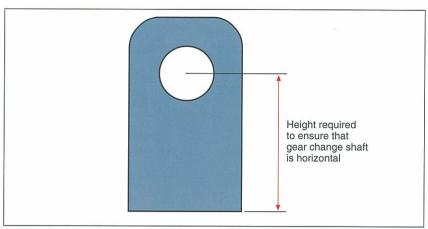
You'll have to adapt this basic bracket to give the required height to make sure that the gear-change tube is horizontal.
